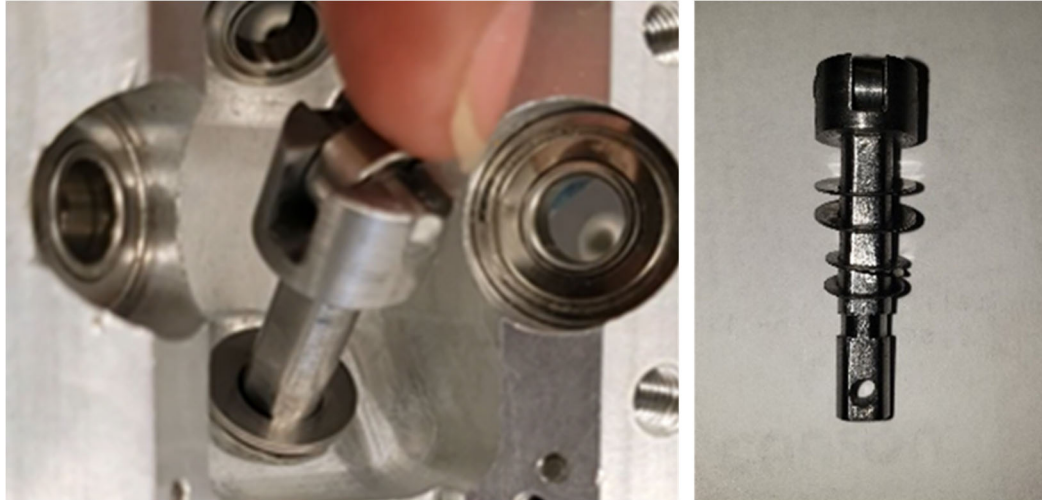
Custom steering roller shafts assembly. The steering roller, steering roller shafts and preloading Belleville springs are pictured here.
